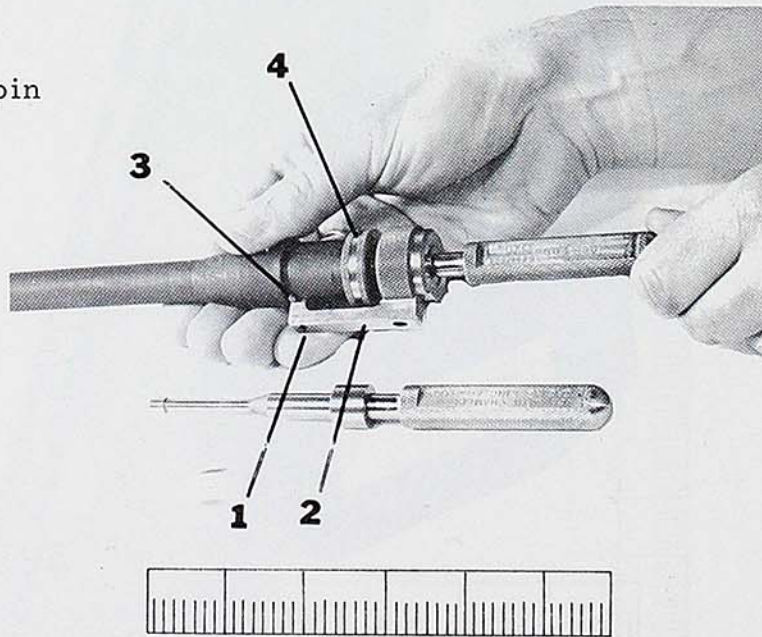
Checking Bullet Seat Depth and Second Shoulder Depth of Chamber.
